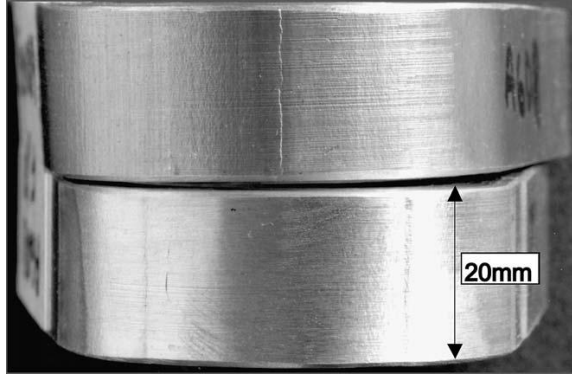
A bend test indicates a root flaw is present in a weld made in 6082-T6 aluminum [Dickerson and Przydatek, 2003]
